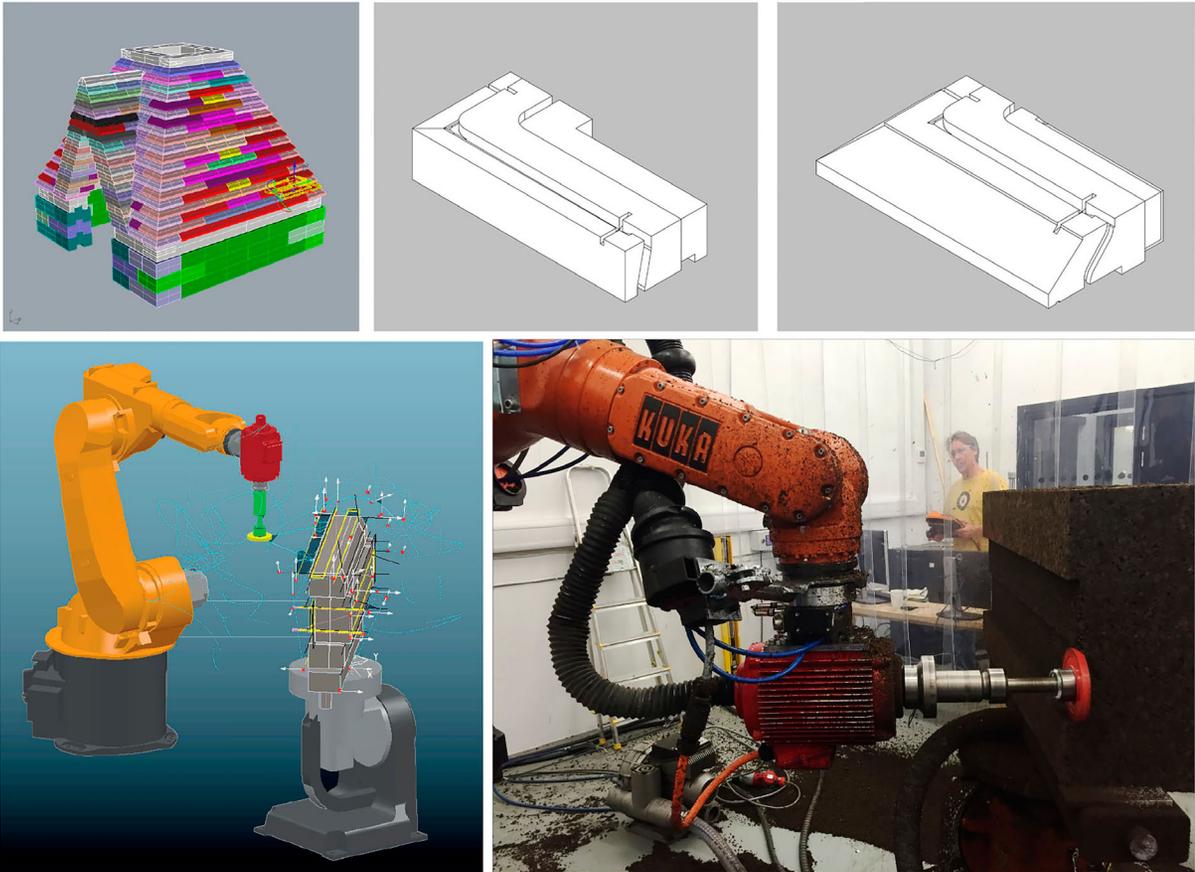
Robotic milling workflow. (top left) Initial Cork Cabin design assembly; (top right) wall and roof cork block designs; (bottom left) determining toolpaths with PowerMill Robot; (bottom right) robotic milling of a cork wall block, © Oliver Wilton and Matthew Barnett Howland
